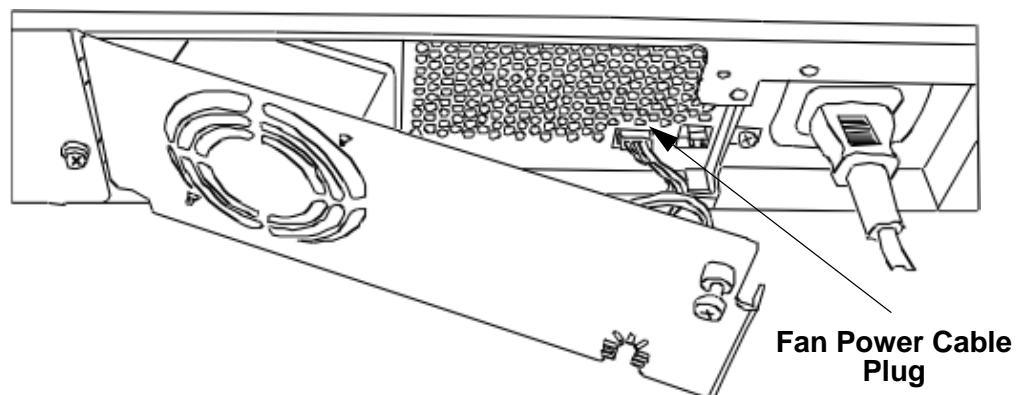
Opening Chassis Access Panel (CHS1U-AU Chassis)
